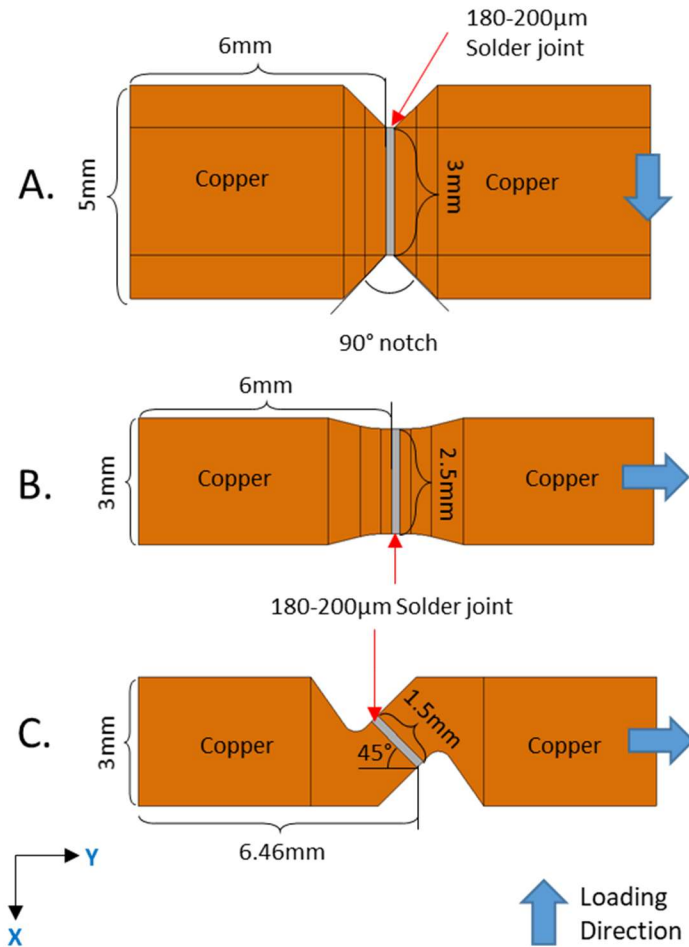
TMM specimens- A.) M0 (Shear) Specimen; B.) M90 (Tensile) Specimen;
